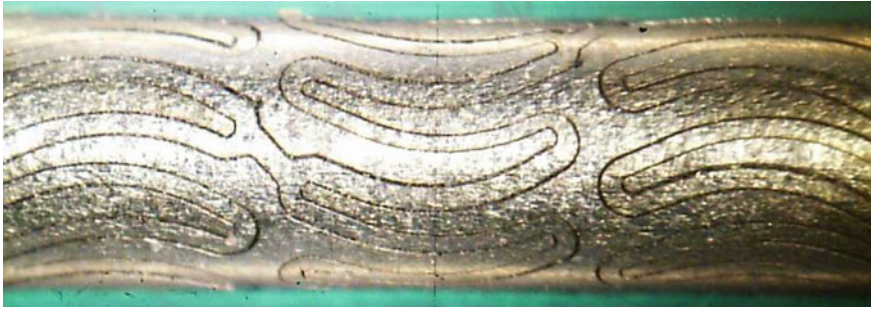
Laser cut stent (diameter 1.6 mm) after cutting (© Fraunhofer ILT)
